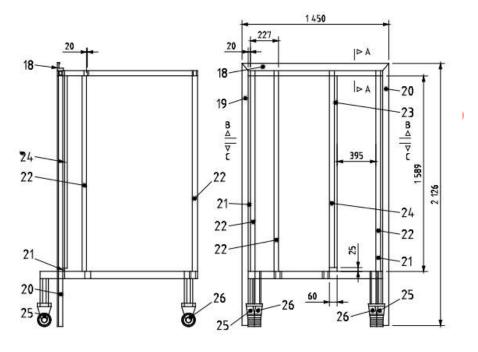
Trolley - Welded parts - Bottom plate
